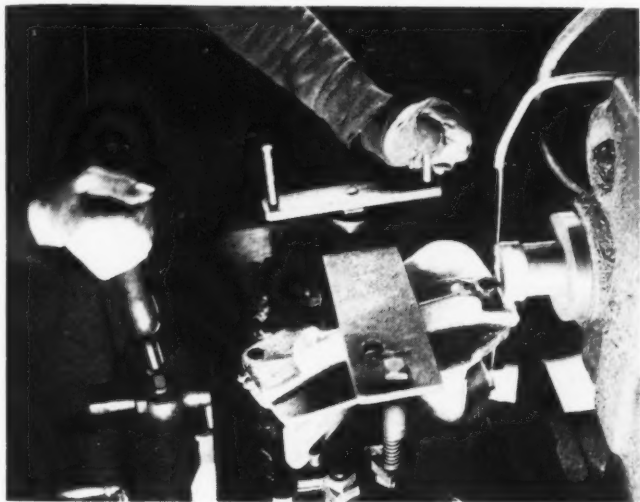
Removing a Gate from a Malleable Casting by Milling. No Teeth are Seen on Cutter Because Photograph was Taken while Operating at High Speed
